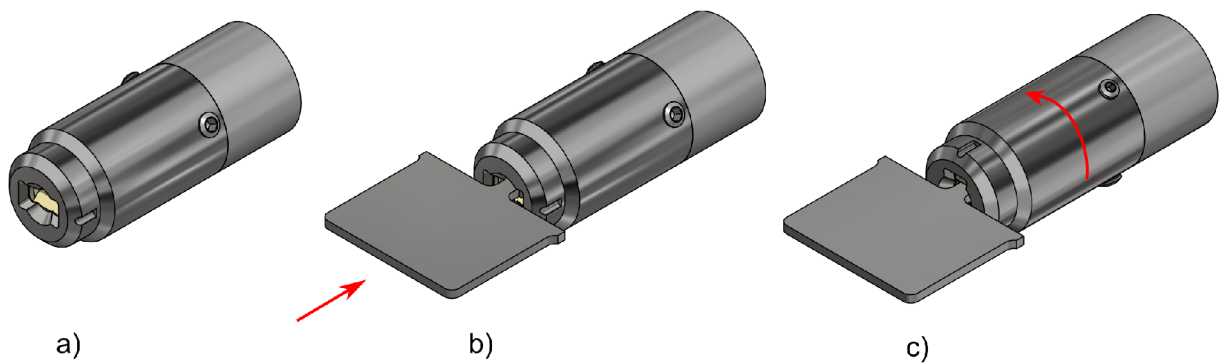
a) Holder with locking mechanism. b) Ear of the sample plate is inserted in the slit. c) The holder is turned 90 degrees, the sample plate is locked.
